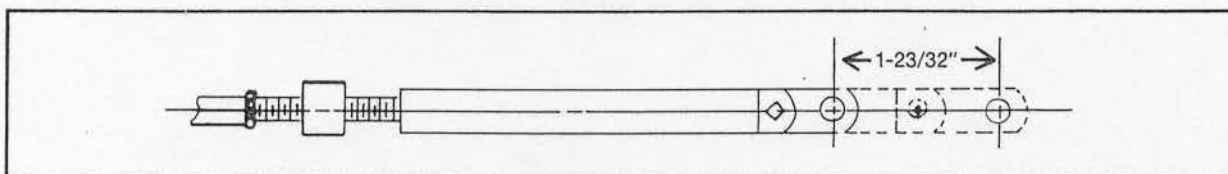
MINIMUM Drive Unit Shift Cable Travel (1-23/32 inches)
